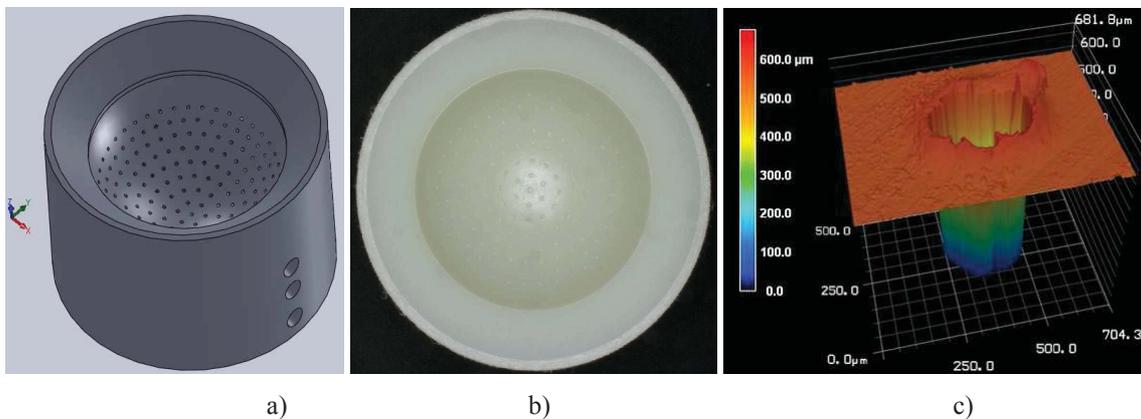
a) 3D CAD model of the acetabular cup with surface dimples and thermocouple holes, b) Manufactured acetabular insert, c) Microscopic image of 0,5 mm in diameter dimple.
